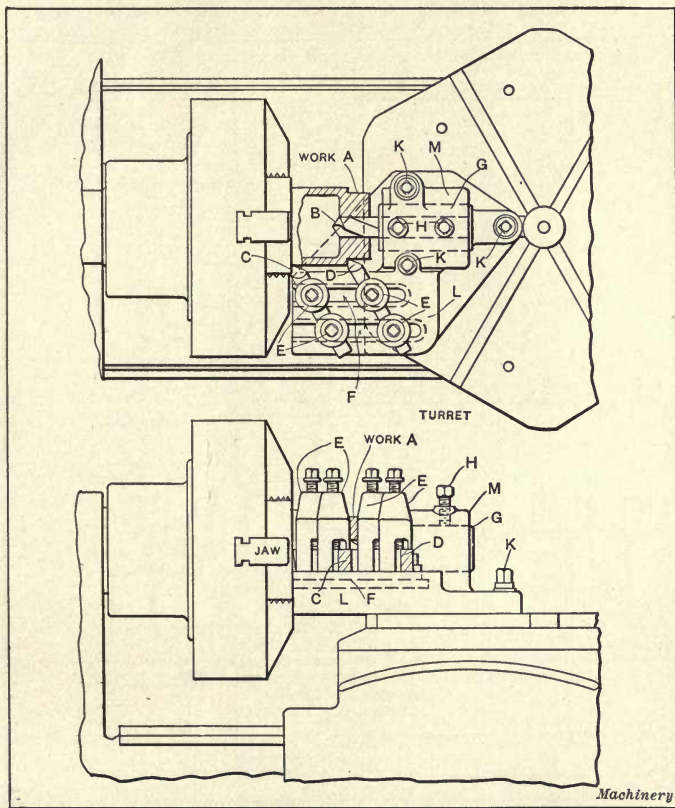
Multiple Tool-holder for the Turntable Type of Lathe
